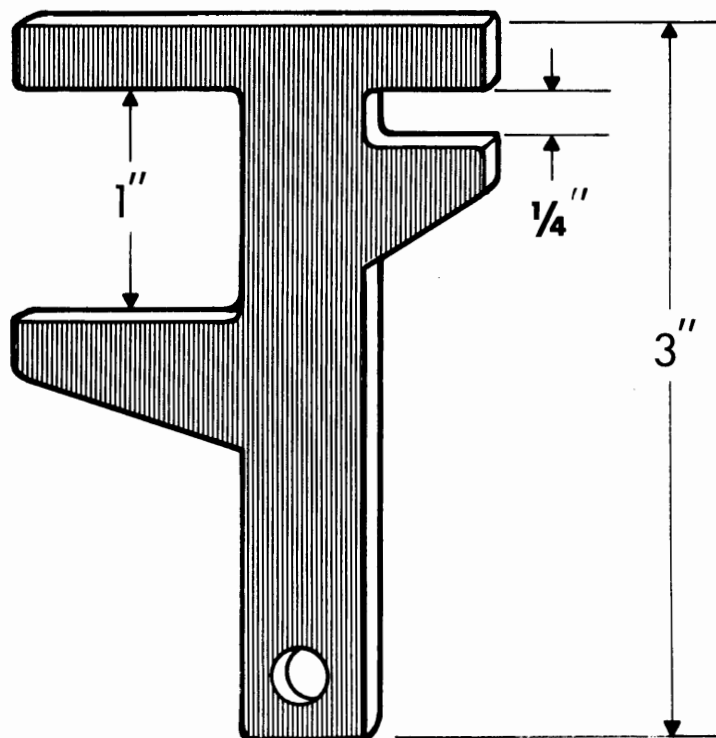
A Go-No-Go gage can be cut from 1/16 or 1/8-inch sheet aluminum. Cut the notches slightly tight and file smooth to final dimensions.
